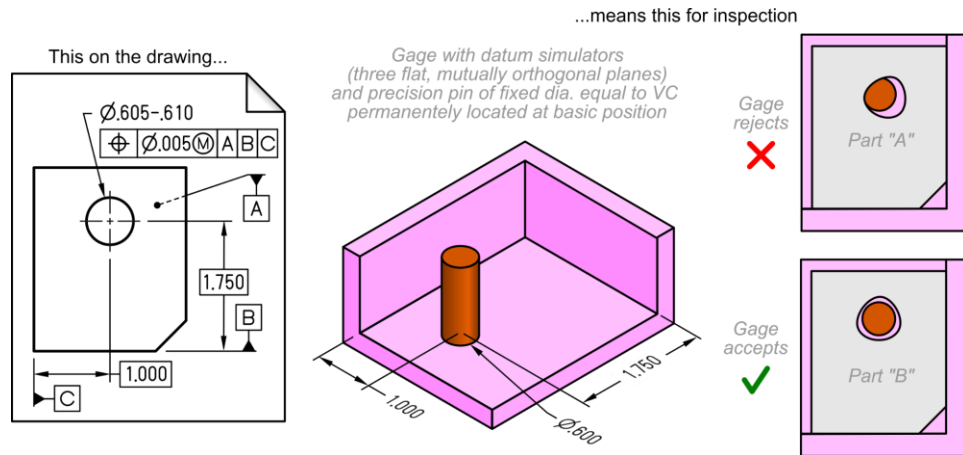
A workpiece and gage that could be 3D printed to explain the measurement of position as specified in the accompanying drawing. Workpiece A is rejected by the gage as out of tolerance. Workpiece B workpiece is accepted by the gage as in tolerance.
